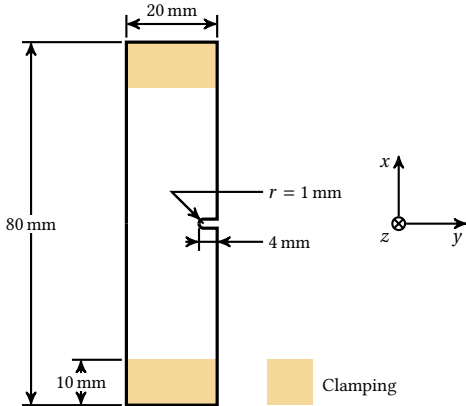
Geometry of SENT fracture test specimen (thickness  $t = (3.22 \pm 0.01)$  mm).
